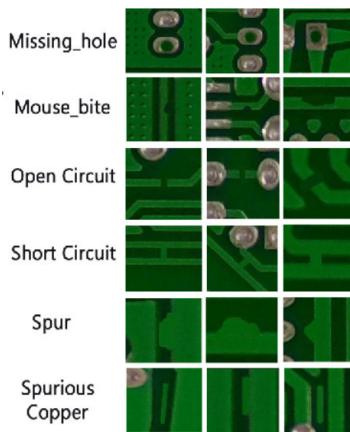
Common PCB defects found in manufacturing industries.
